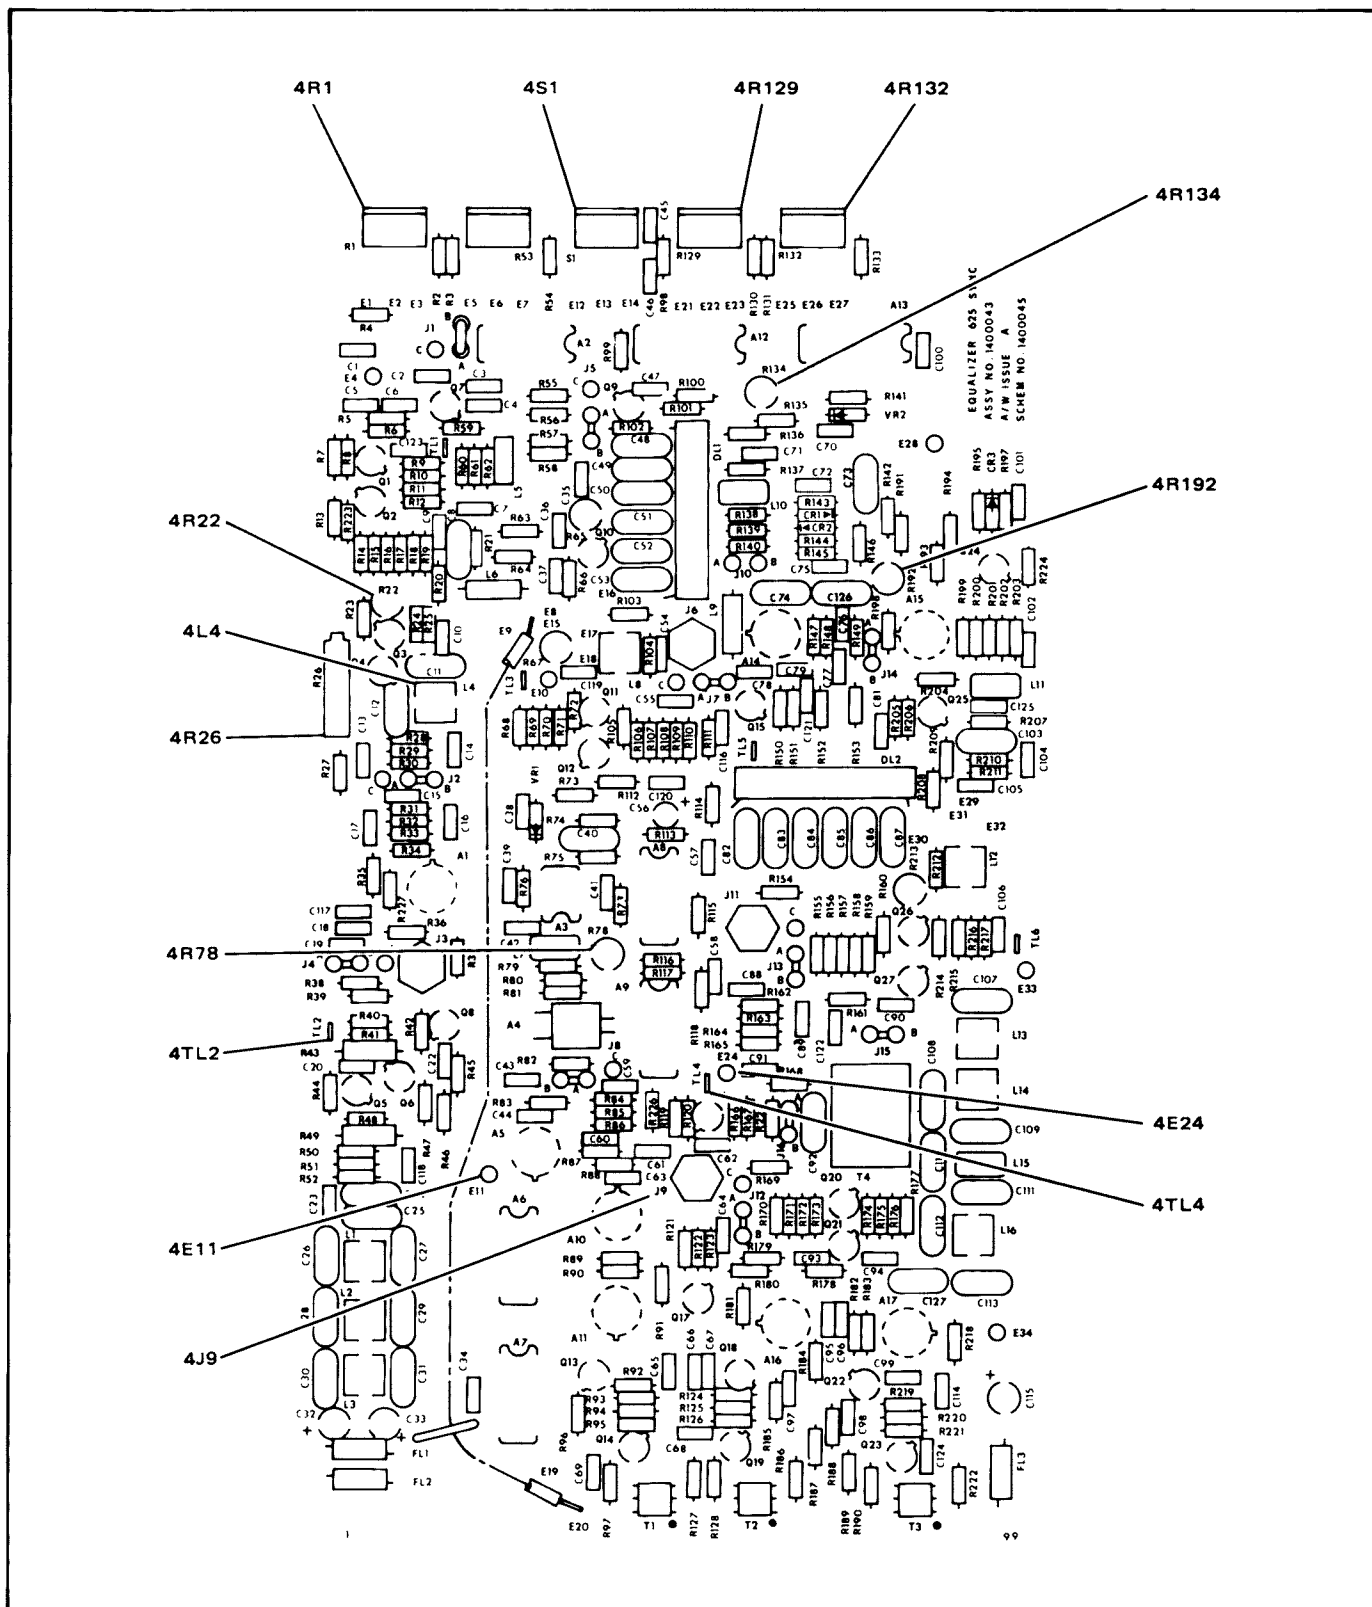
Equalizer Sync PWA 4 (625), Assembly No. 1400043
